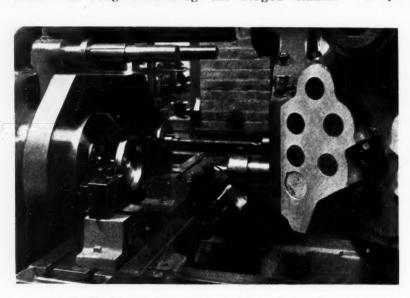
Machining the Gear Shown in Fig. 1 on a Potter & Johnston Two-spindle Automatic Chucking Machine
